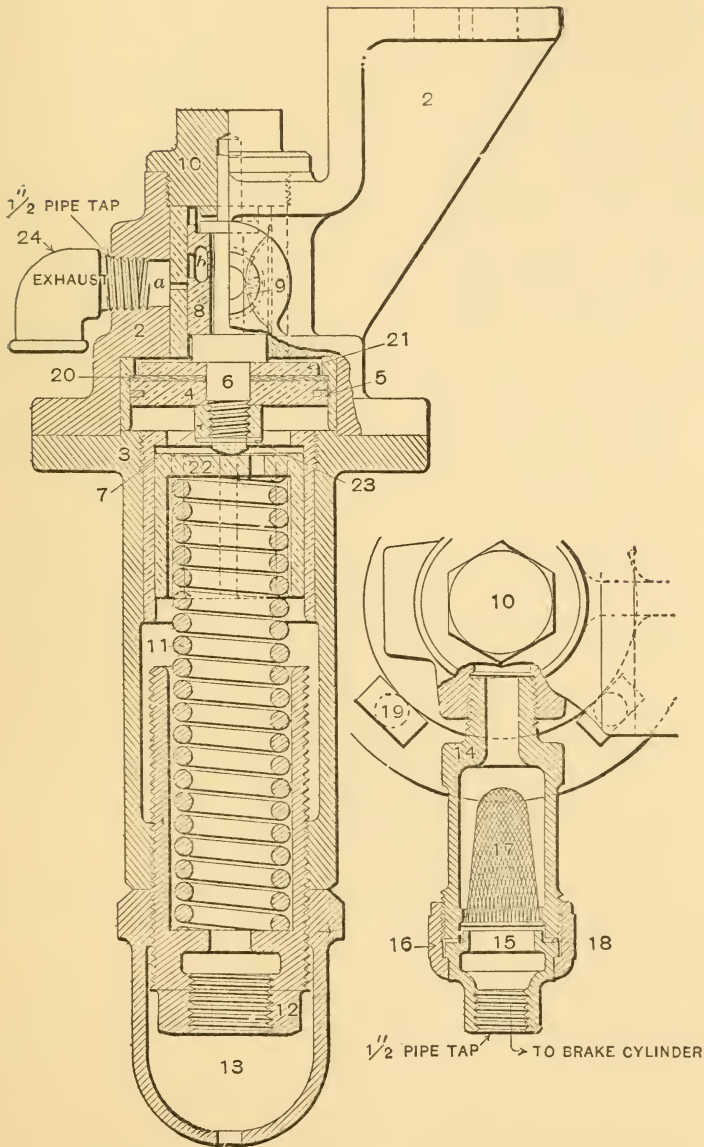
HIGH-SPEED AUTOMATIC REDUCING VALVE.
